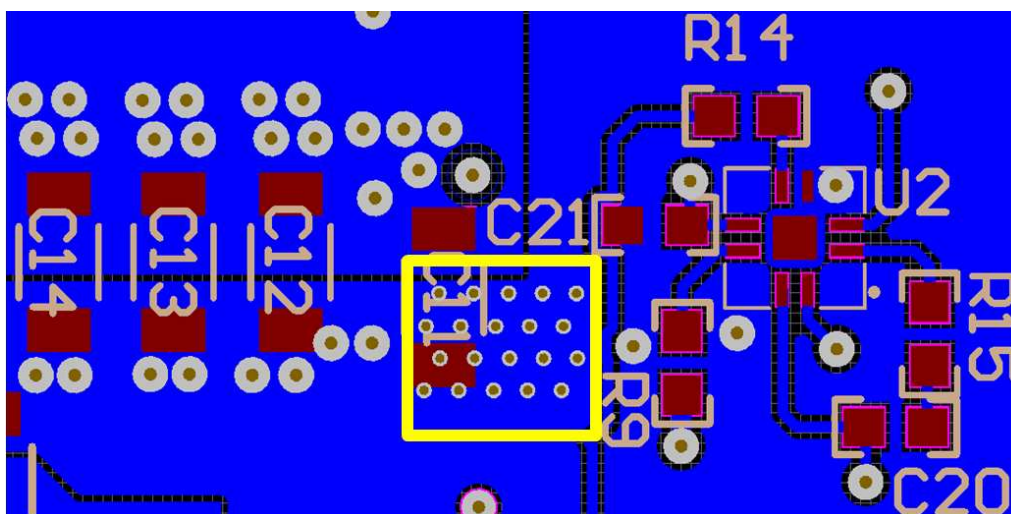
Recommended PCB Layout (Bottom View) ⁽²⁾
